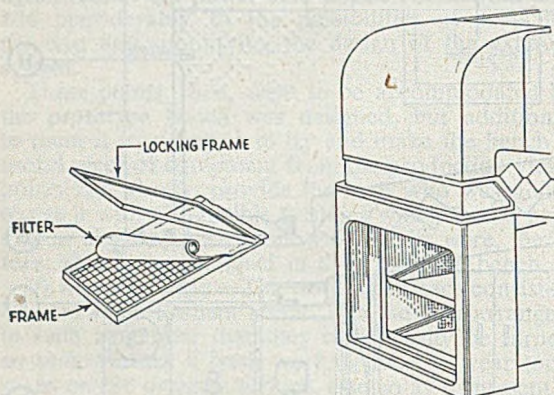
Details of the Cotton-wool Filter Unit incorporated into the Fettleing Bench.
